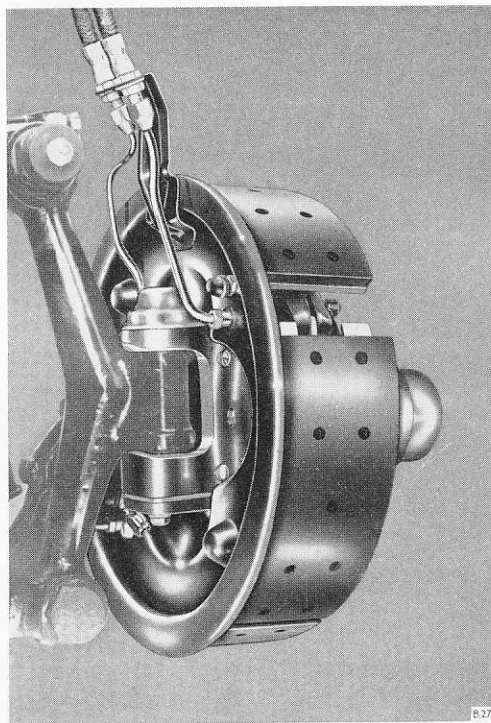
Bentley Continental S2 — four shoe brake — rear view
